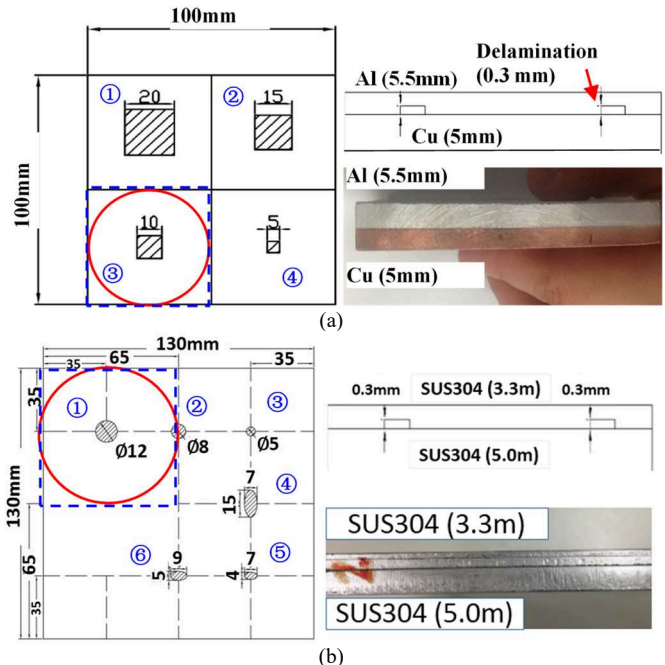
Schematic of specimens. (a) Al-Cu double-layered specimen; (b) SUS304 double-layered specimen
